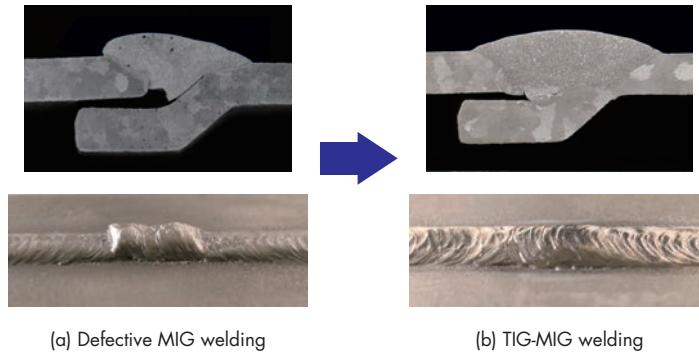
Improving penetration quality and controlling reinforcement height by TIG-MIG welding
